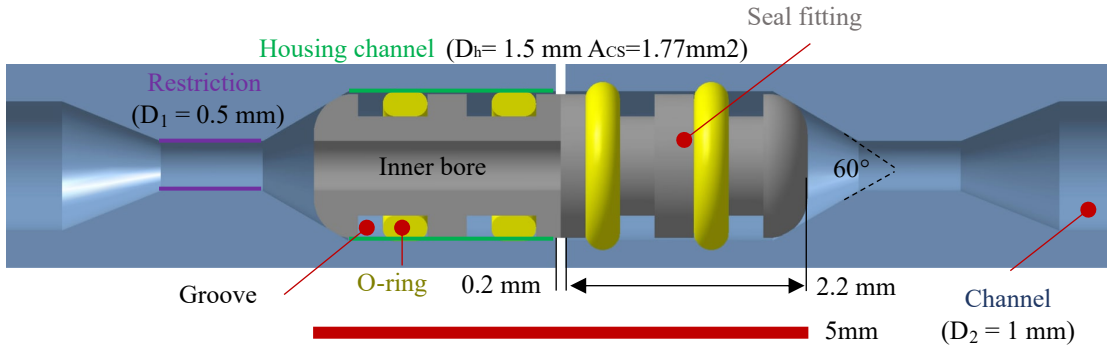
The radial seal solution. CAD design of the interconnection. The left side of the seal fitting is sectioned to highlight the inner bore.
